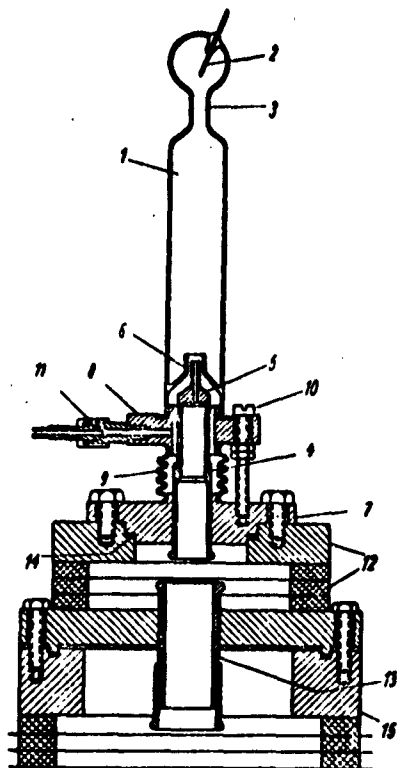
Construction of high-frequency ion source. 1) Housing; 2) anode; 3) neck; 4) cathode; 5) cathode terminal piece; 6) screen; 7) source flange; 8) upper flange; 9) bellows; 10) adjusting screws; 11) nipple; 12) tube; 13) focusing electrode; 14) gasket; 15) flange.
